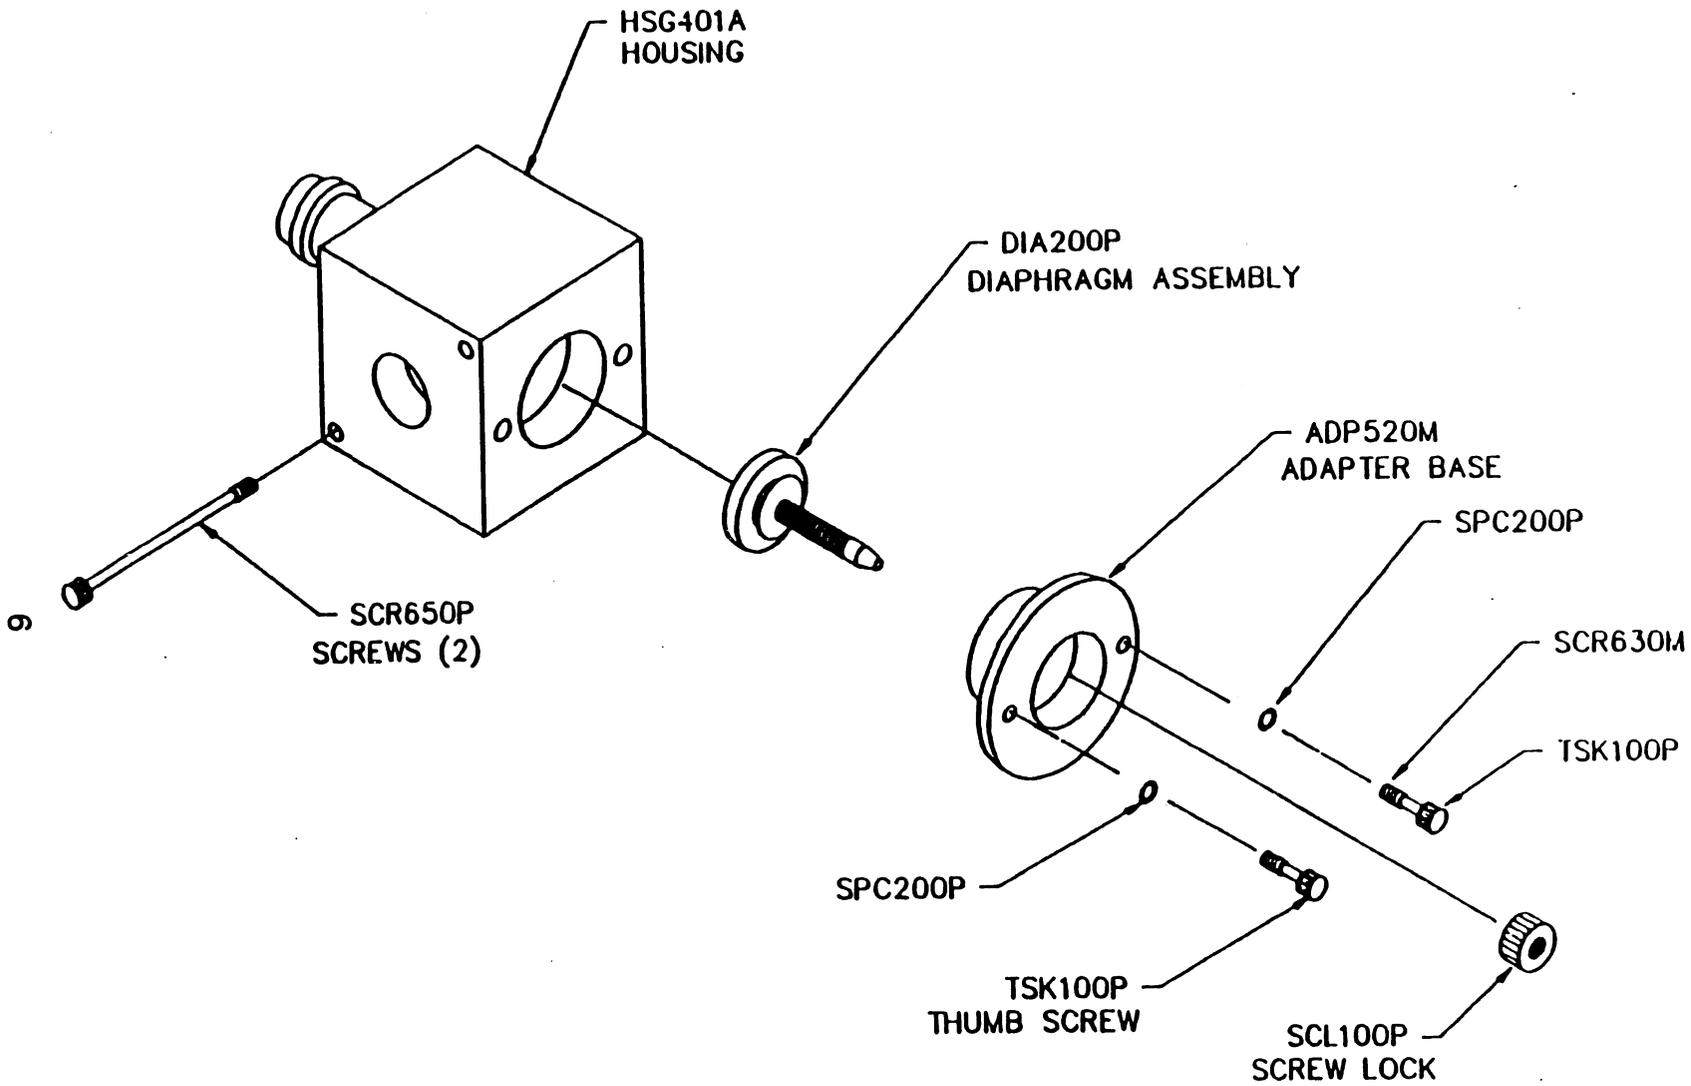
(a) Exhalation Valve Assembly (Adult)
